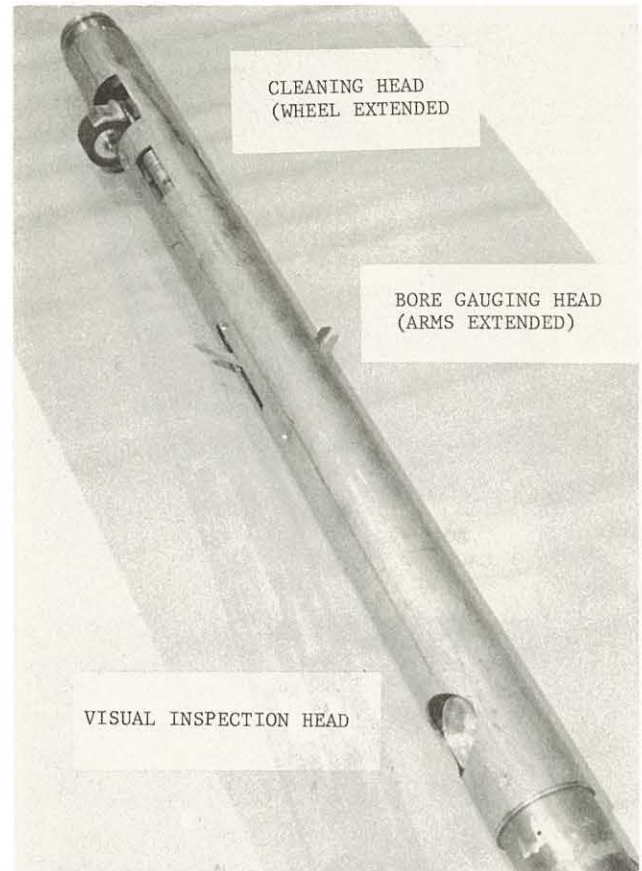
ARRANGEMENT OF THE TOOL HEADS
